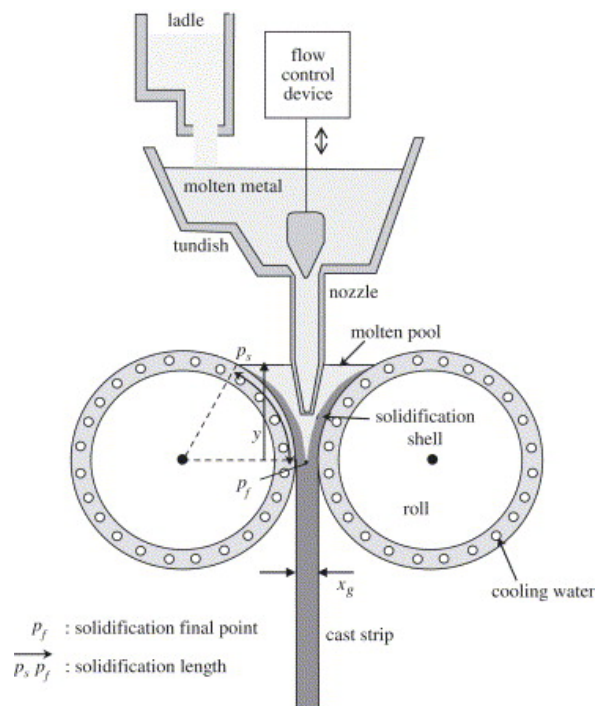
Schematic illustration of a downward twin roll caster [14]
